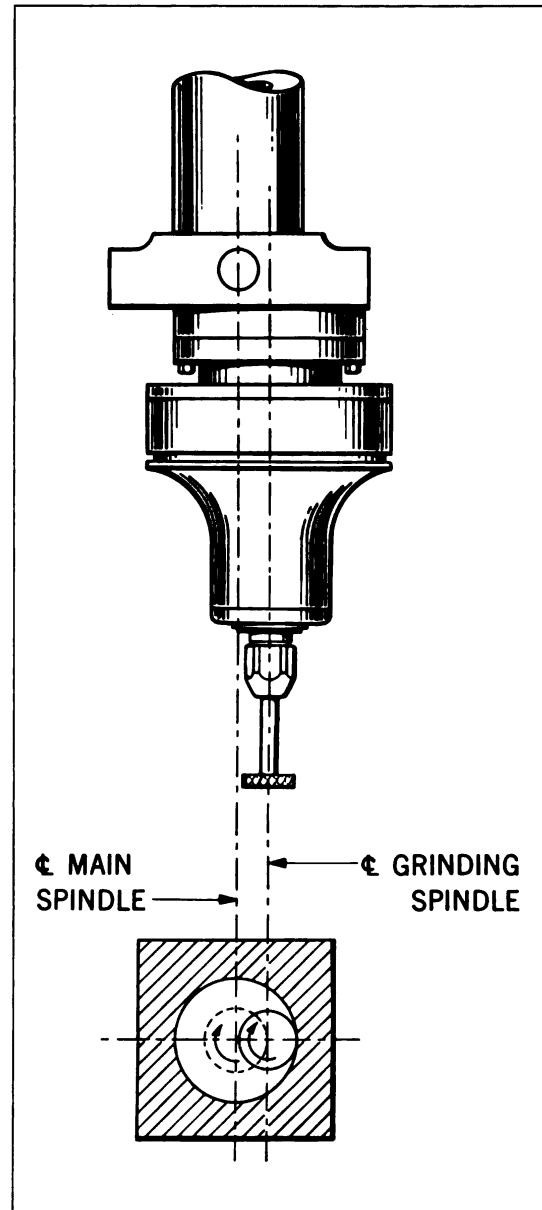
High-speed pneumatic grinding spindle adjustably offset from main spindle. Lower view shows planetary path of rotation.
